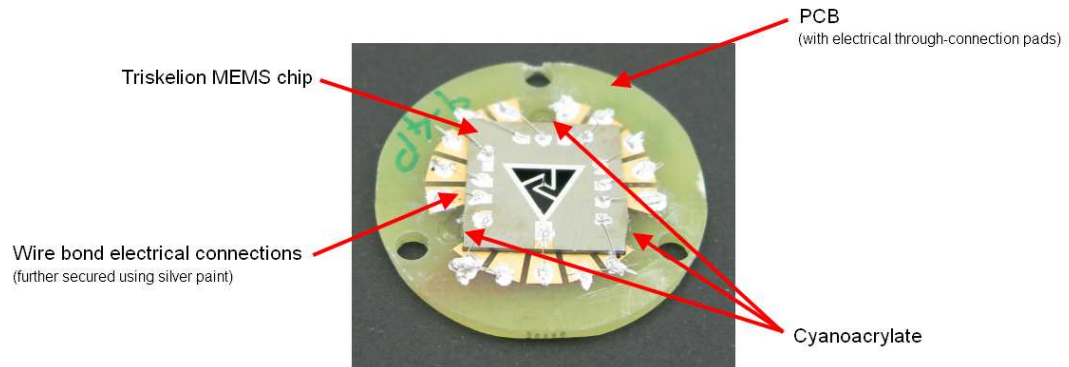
The probe mounted on a connection PCB using three small drops of cyanoacrylate glue
